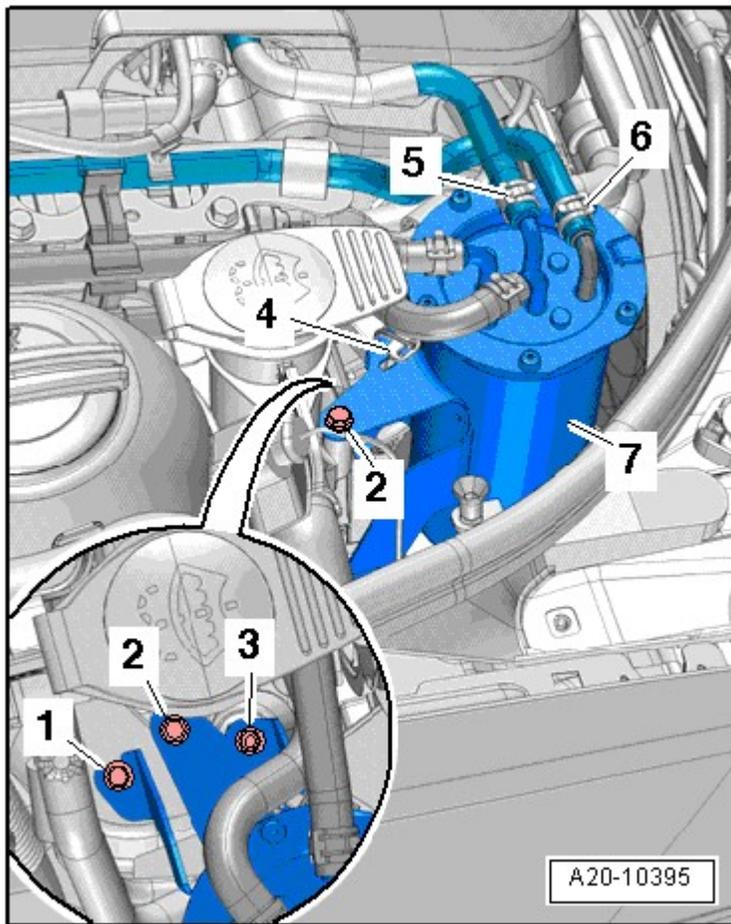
Identifying Bracket And Auxiliary Fuel Pump And Bolts
